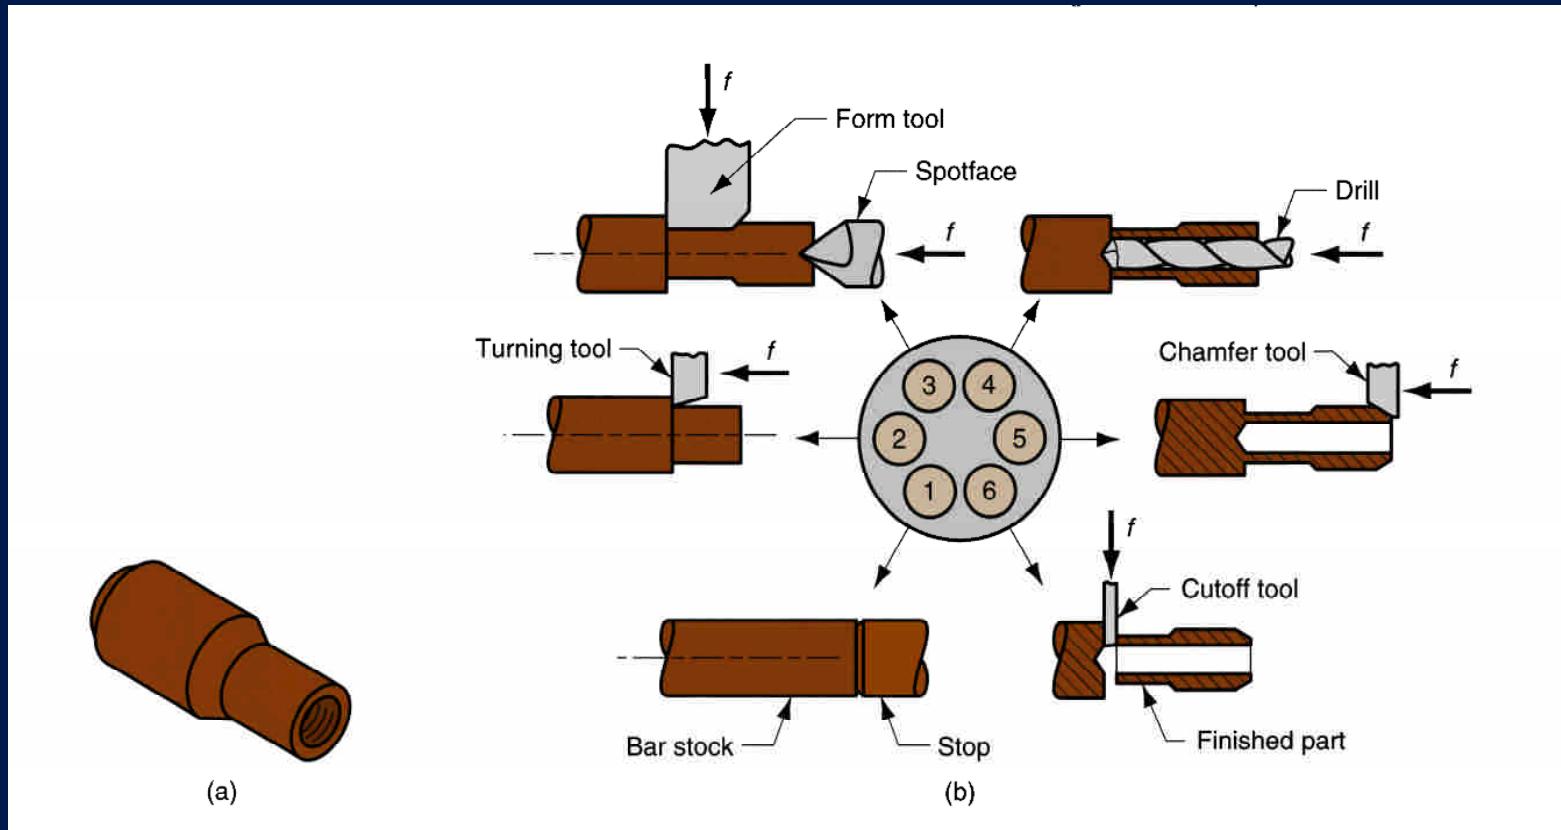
(a) Part produced on a six-spindle automatic bar machine; and (b) sequence of operations to produce the part: (1) feed stock to stop, (2) turn main diameter, (3) form second diameter and spotface, (4) drill, (5) chamfer, and (6) cutoff
